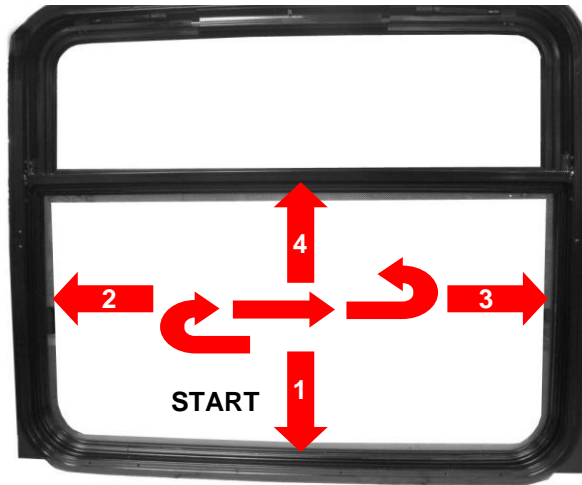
REMOVE CLIPS (IN ORDER SHOWN)
